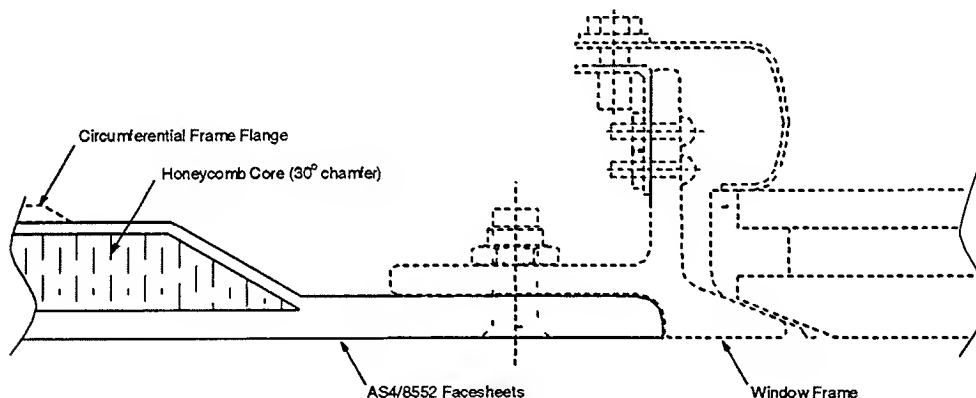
Ramped Core Close-Out Design Concept for Window Cutouts.
